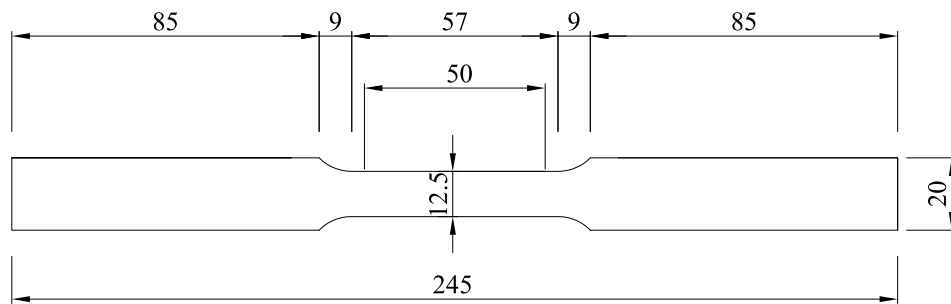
Dimensions of tensile coupon (dimensions in mm)
